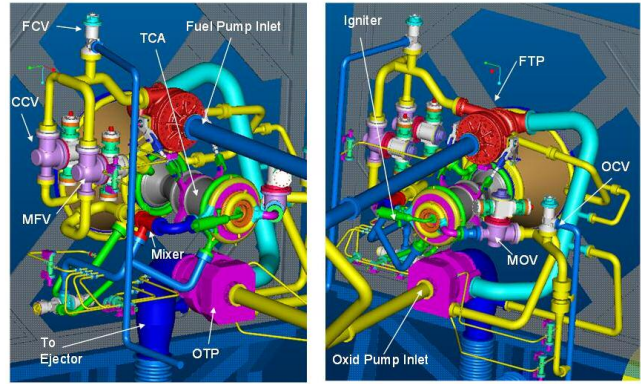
MB-XX Demonstrator Engine Mechanical Arrangement
